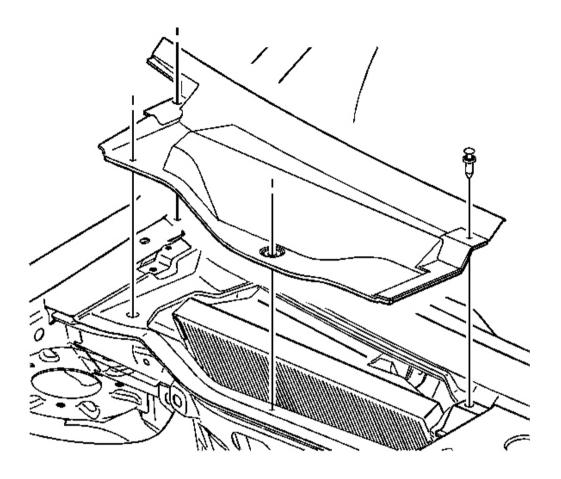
Push Pins & Air Filter Access Panel Courtesy of GENERAL MOTORS CORP.
